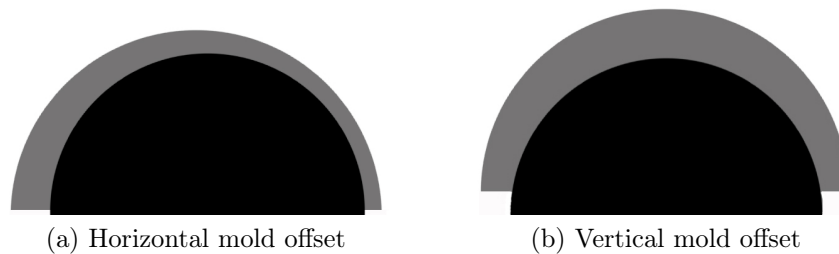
Molding defects. Misalignment of the hemisphere and mold cavity in (a) the horizontal direction and (b) the vertical direction cause errors in the layer thickness.
